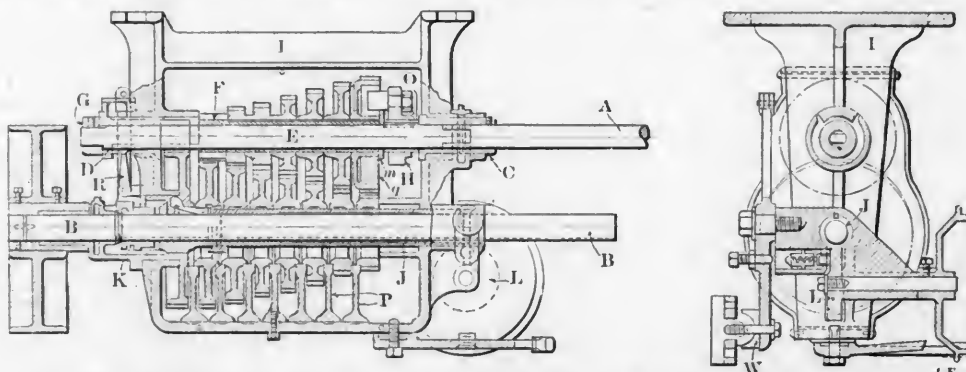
LONGITUDINAL SECTION AND CROSS SECTION THROUGH SHIPPER MECHANISM.
